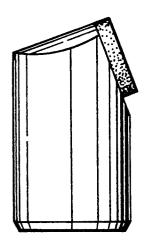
is a left side elevational view, the right side elevational view being identical thereto;
